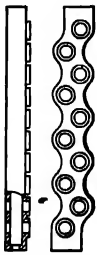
Details of Header — B. & W. Boiler. (Inclined Header.)
